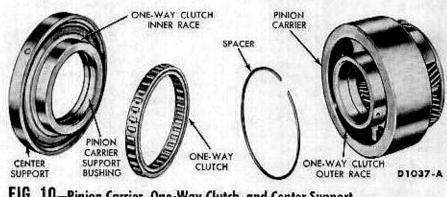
Pinion Carrier, One-Way Clutch, and Center Support
